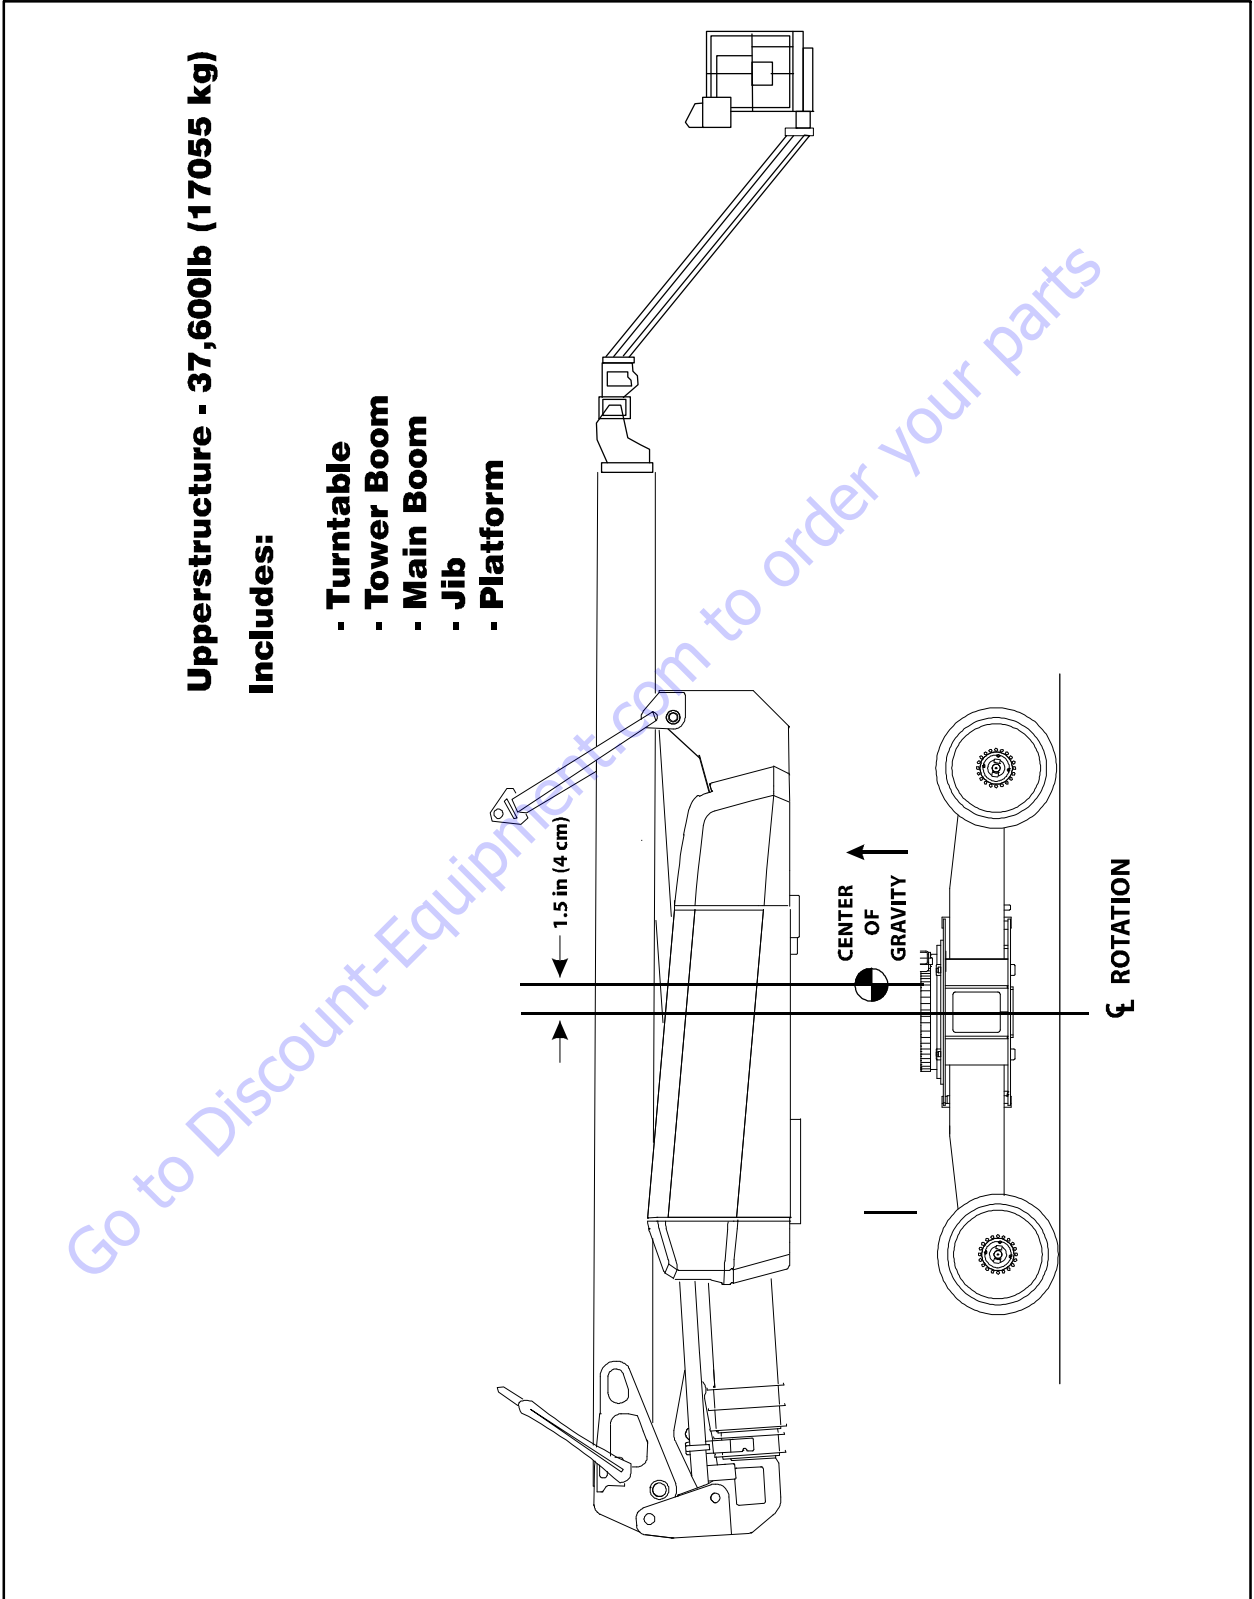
Swing Bearing Removal - Sheet 1 of 4
